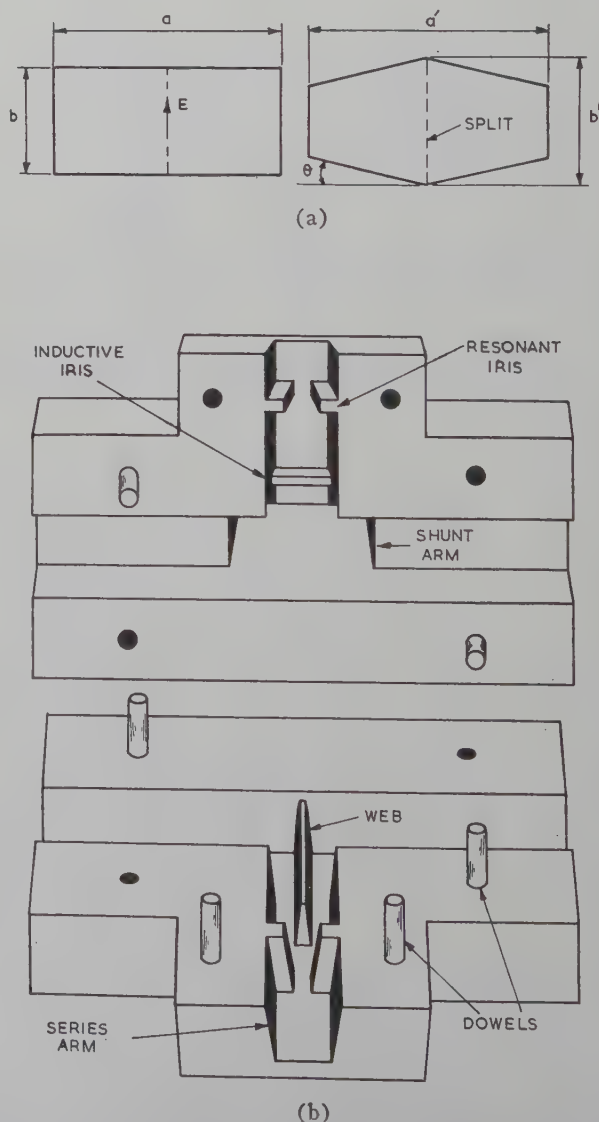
Components made by pressure die-casting; (a) equivalent hexagonal guide-section; (b) hybrid-T cast die in aluminium.
